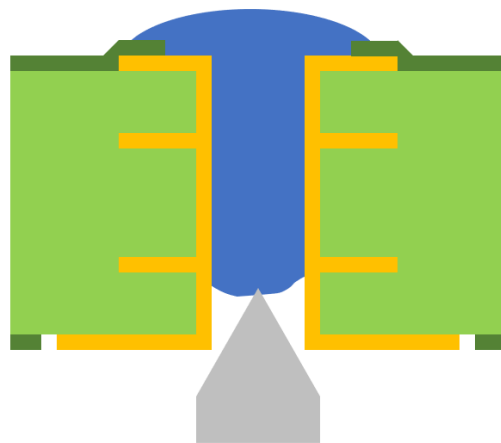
ICT Probe Contact Issue due to Soldermask Plug
